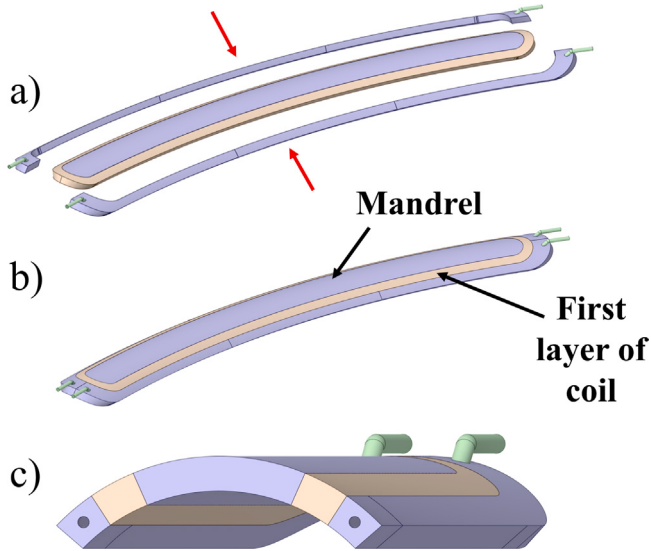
(a) Halves of wedges, (b) their assembly around the mandrel and first layer of coil and (c) cross-section of the assembly.
